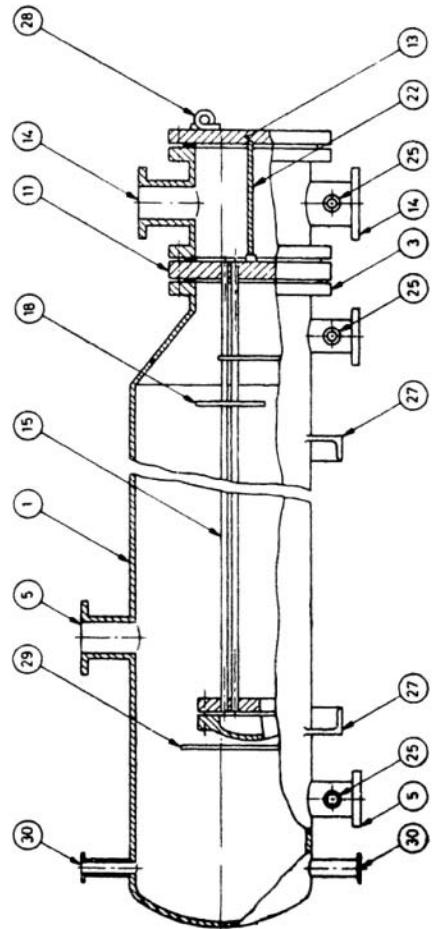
INTERNAL FLOATING HEAD (REBOILER OR KETTLE TYPE) HEAT EXCHANGER
